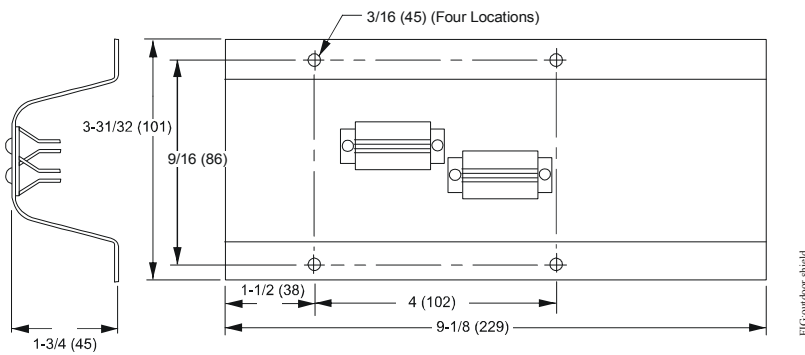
A99SY-1C Strap-Mount Sensor Dimensions, in. (mm)
